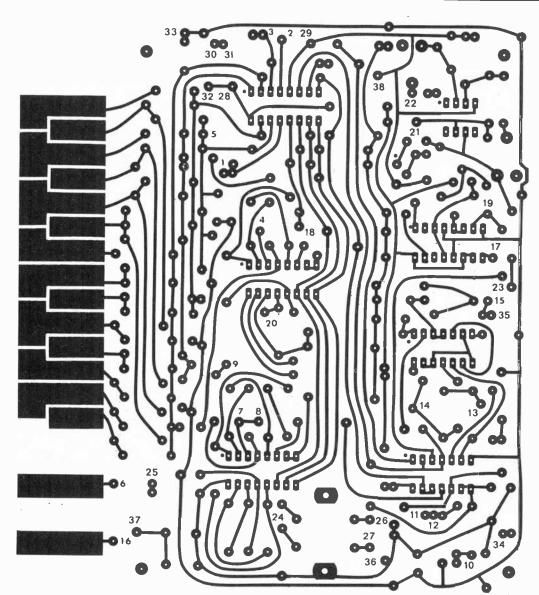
Etching and drilling guide for printed circuit board is at right; component layout on opposite page. Table below layout gives connections to numbered points on the pc board.
